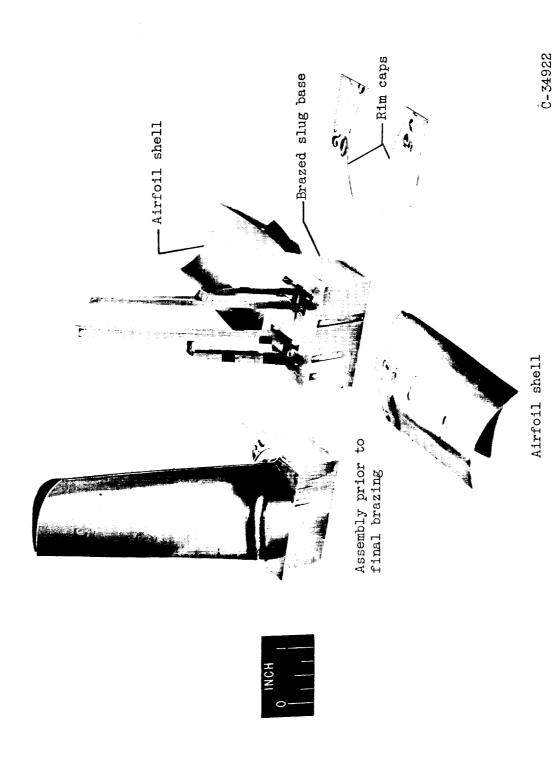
Slug base and fingers brazed into integral unit. Airfoil shells with rim cap piece.
